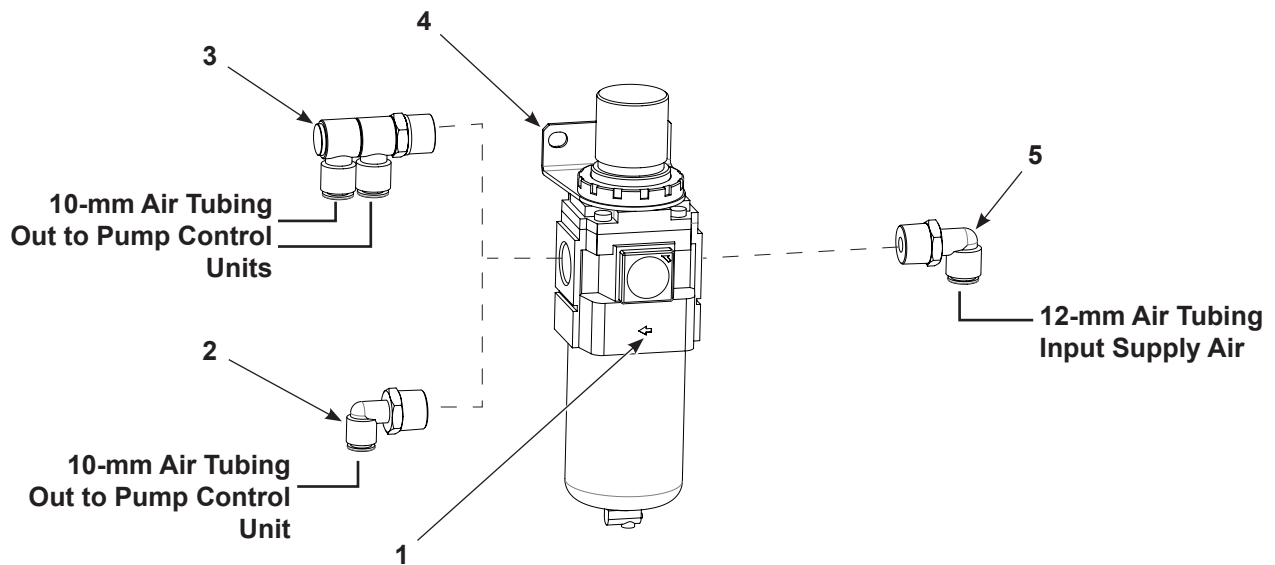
Air Filter Installation – Standalone and Rail/Wall Mount Systems
